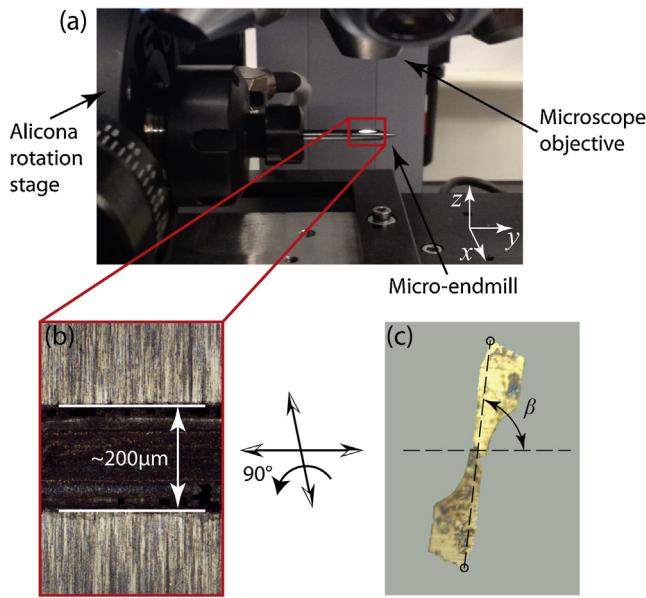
Optical procedure to find the angle β between the reference mark and the cutting edge of a micro-endmill: (a) micro-endmill clamped to the rotary stage of the Alicona measurement system, (b) the reference mark on the tool shank, and (c) the tool-tip view after rotating the micro-endmill by 90 deg about the x-axis.
